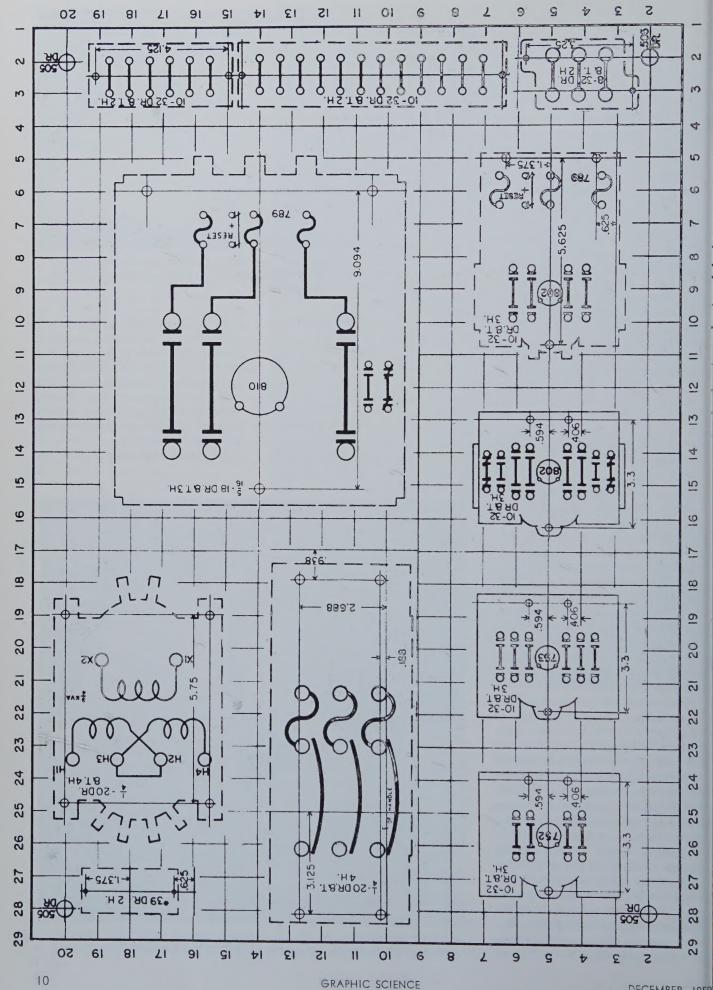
In photographic panel drawing system, full-scale templatesprinted on card stock-are arranged in position on layout table for photographing.
